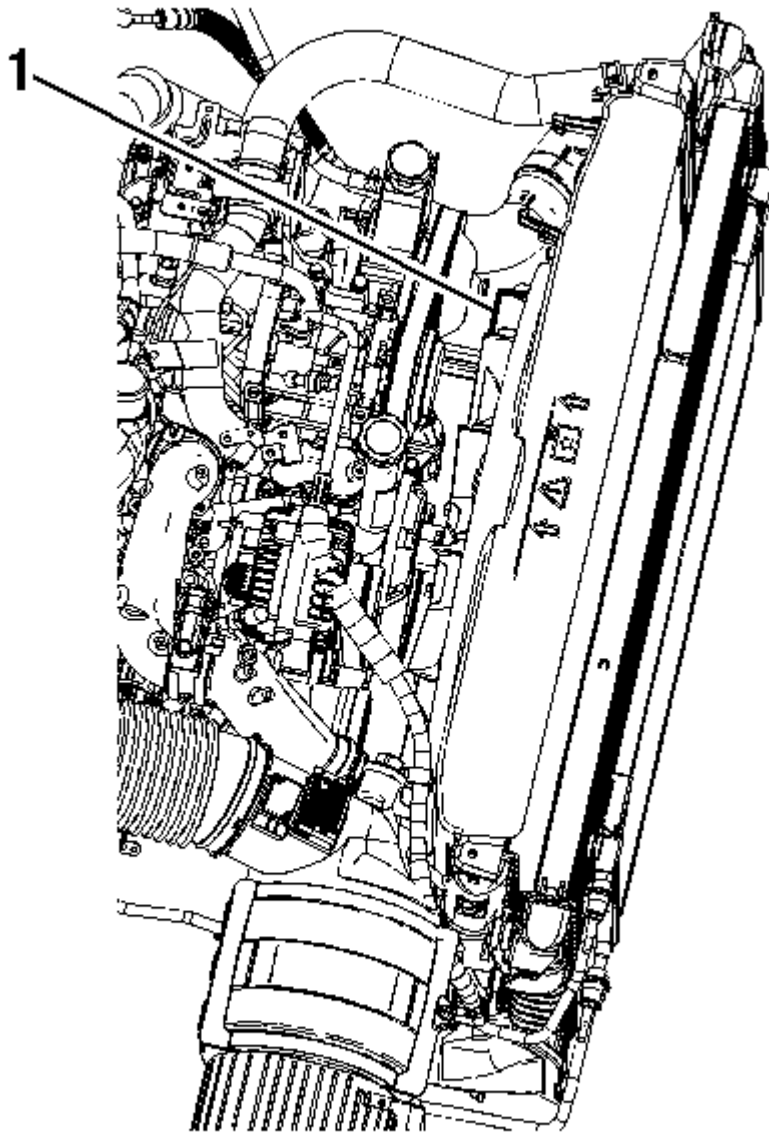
Identifying Fan Shroud Mounting Brackets & Bolts
